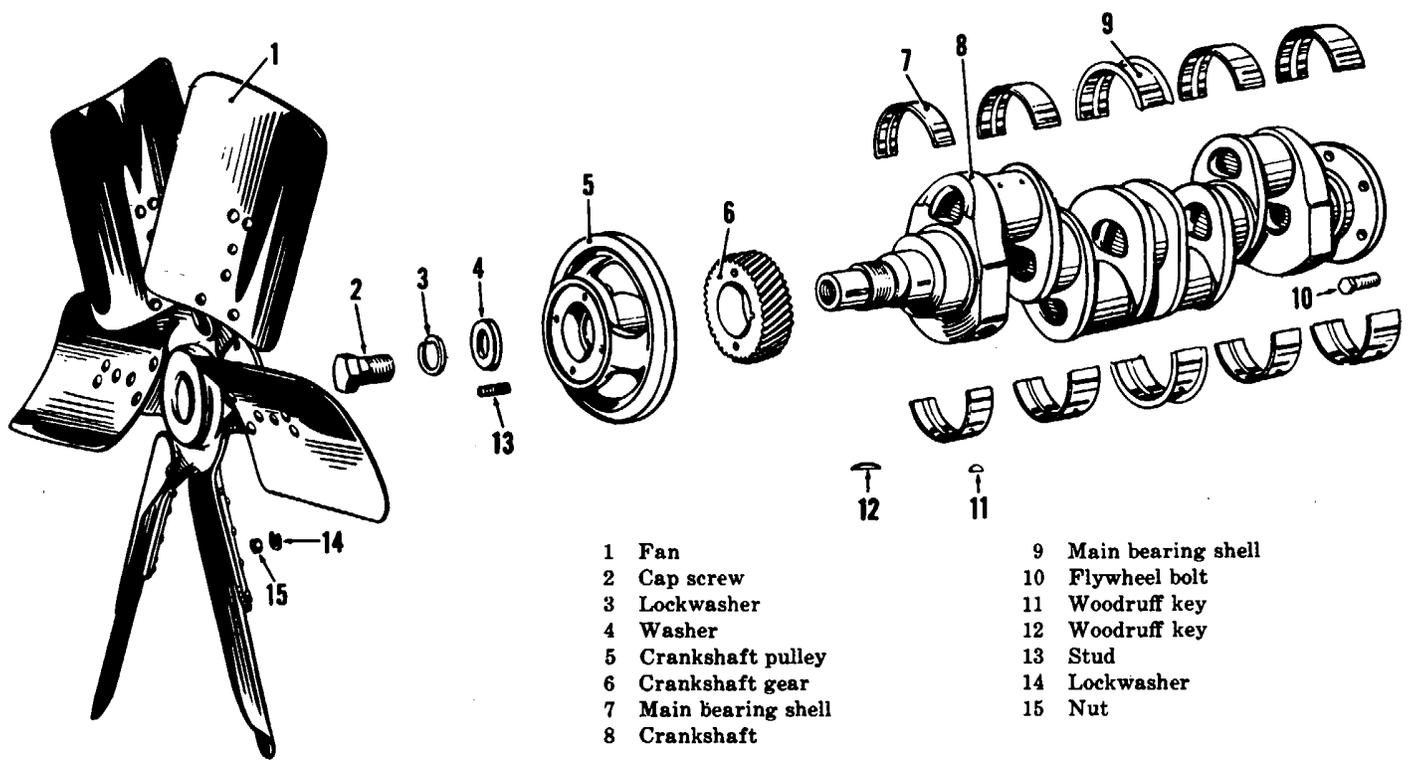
Exploded view of crankshaft, fan, and main bearings.
